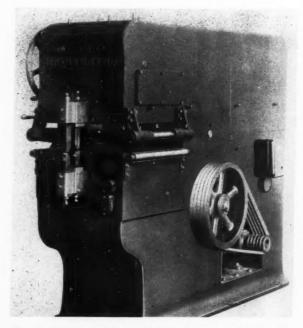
This special machine tool shows a high ratio drive. Shield has been removed
